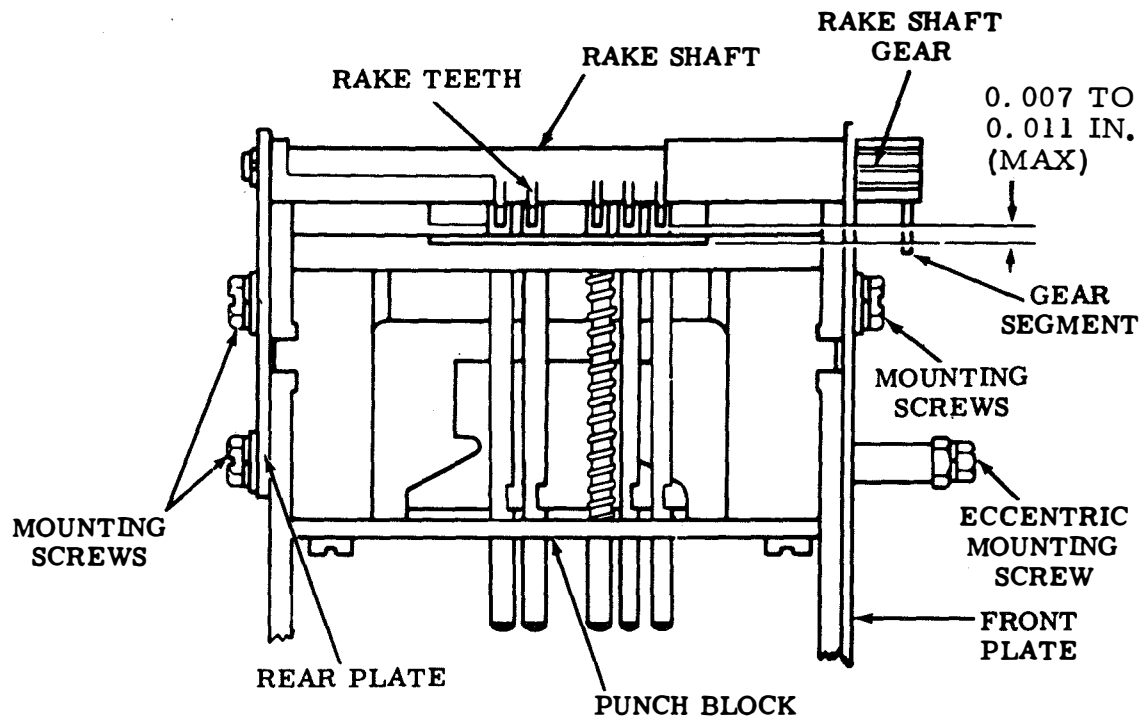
Rake Assembly, Reperforator, Left Side View
